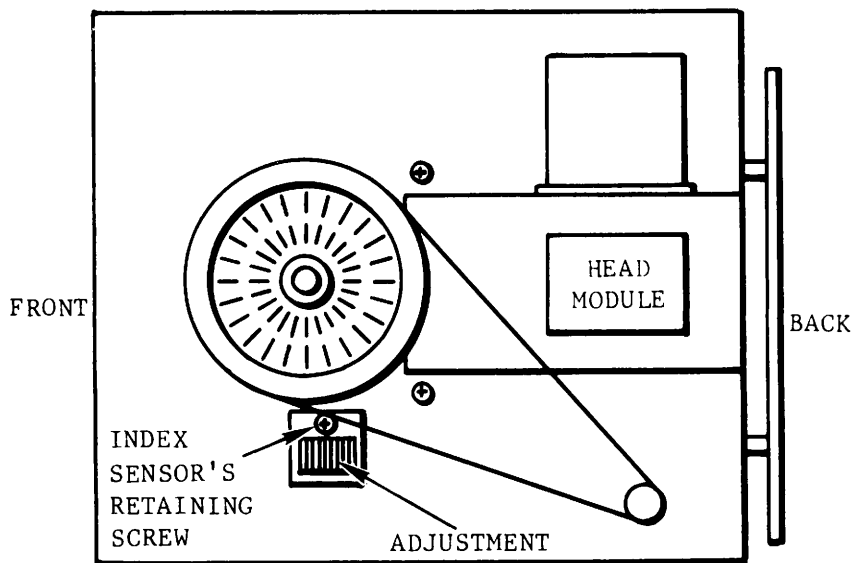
Index Sensor Retaining Screw and Adjustment
